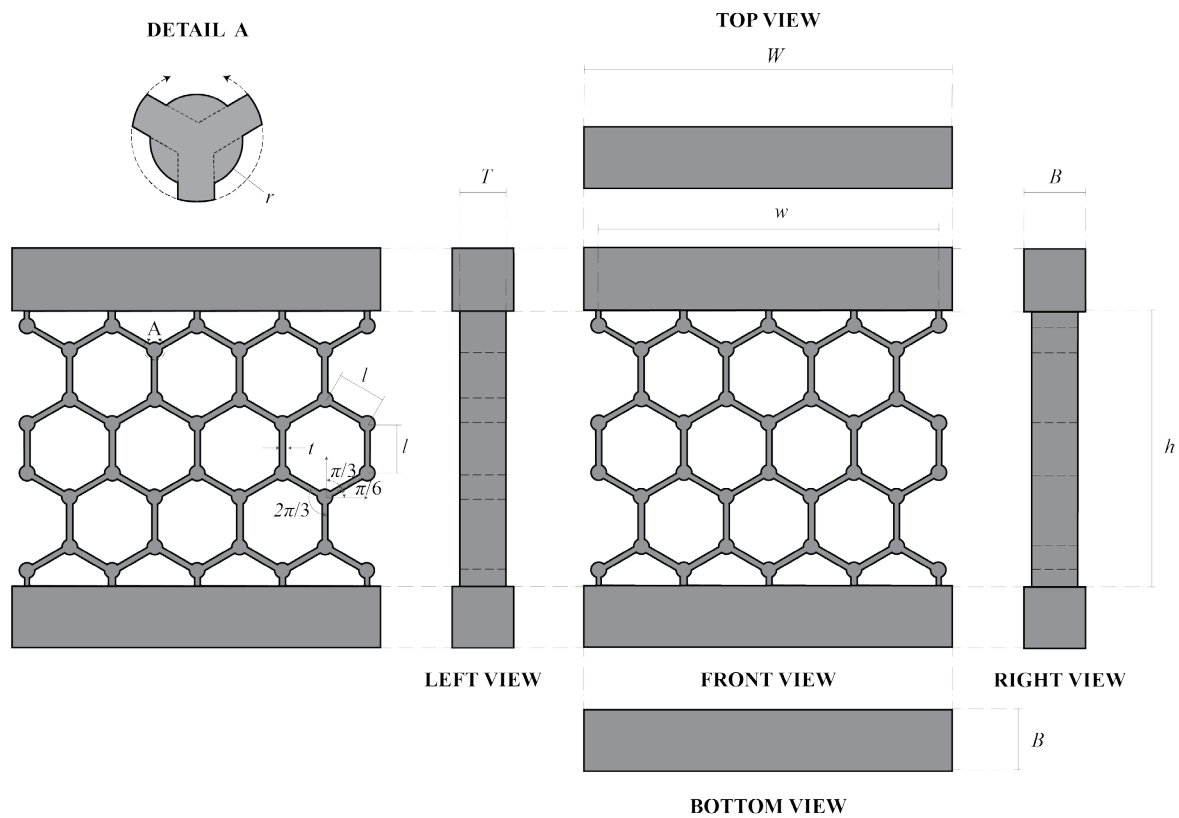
Technical drawing of the Lumped-node hexagonal honeycomb specimen, employing the American projection convention
